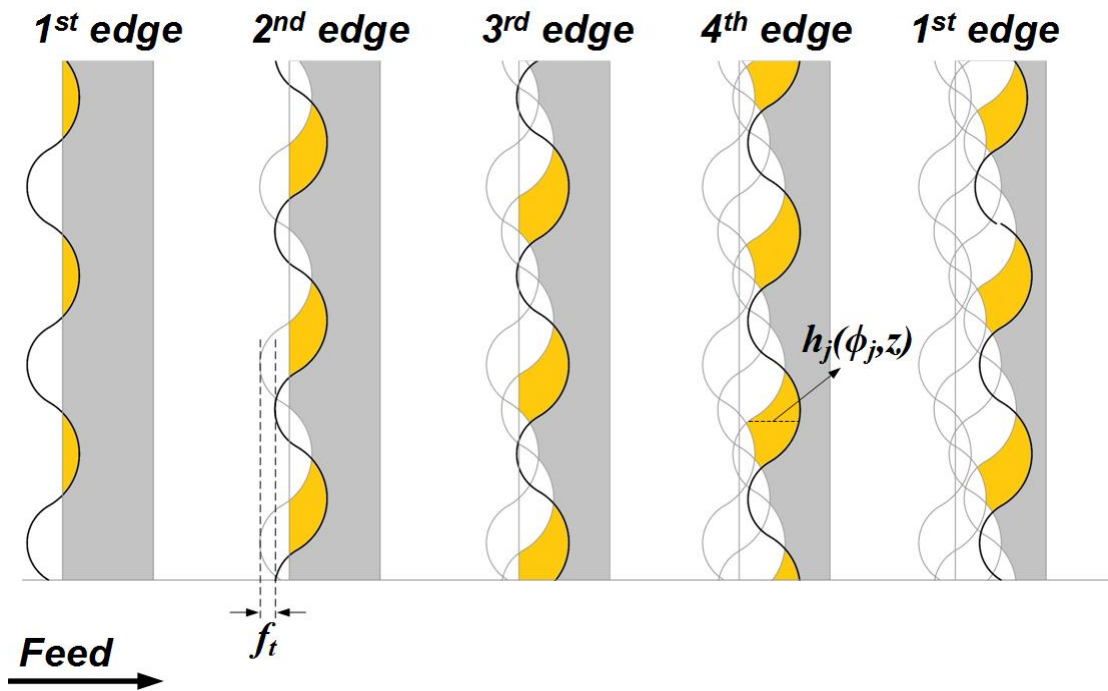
Chip load of a serrated cutter having equally separated circular wave formed edges
